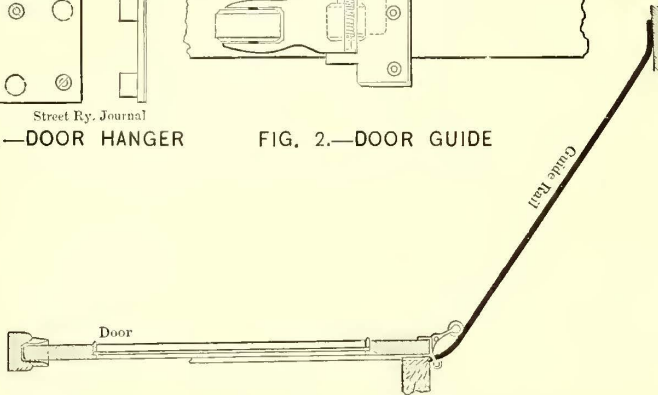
PLAN OF DOOR AND GUIDE RAIL
